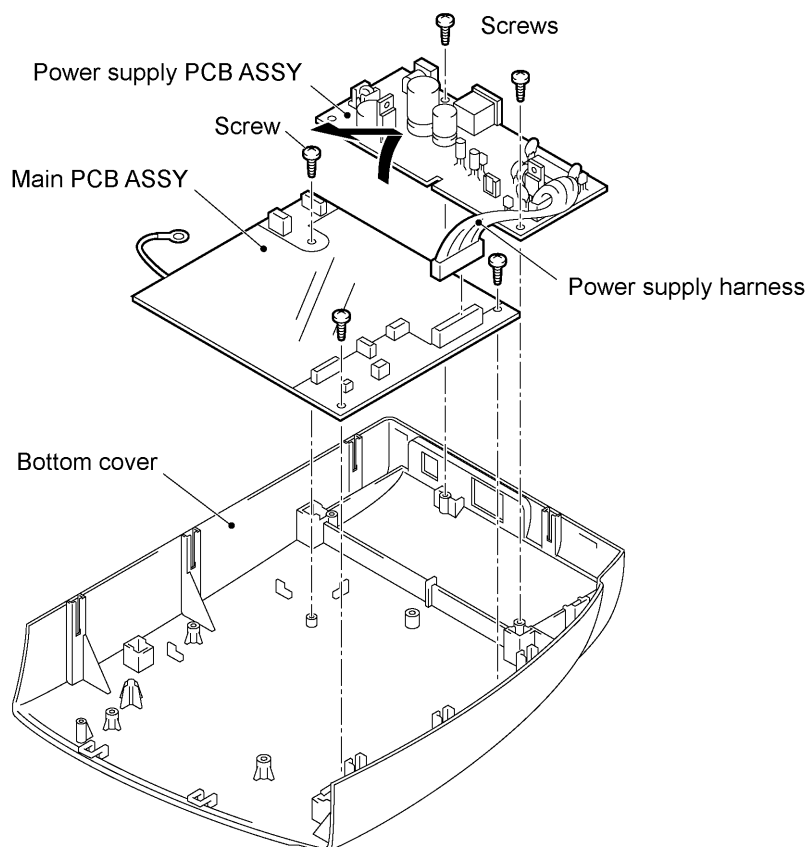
Removing the Main PCB ASSY and Power Supply PCB ASSY
